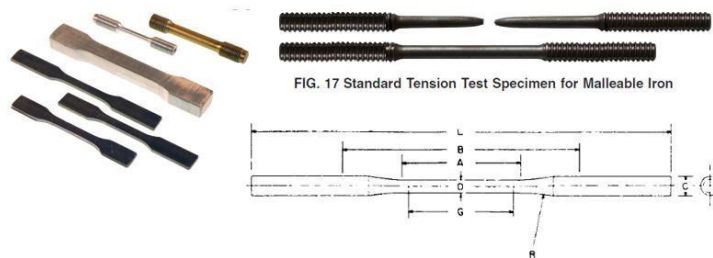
Standard Tension Test Specimen for Malleable Iron
